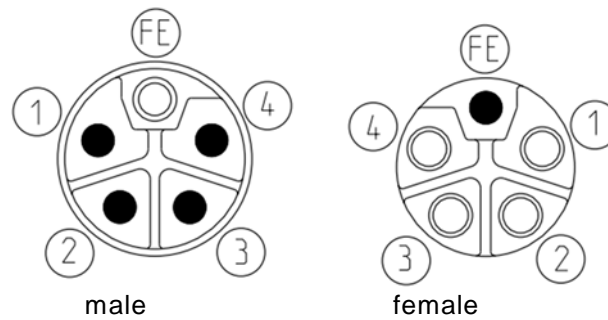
M12 L-coding contact position 4+FE front view
